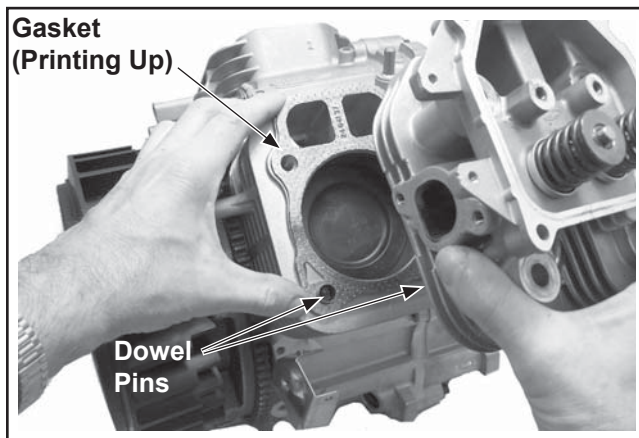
Installing Cylinder Head Gasket and Cylinder Head.
